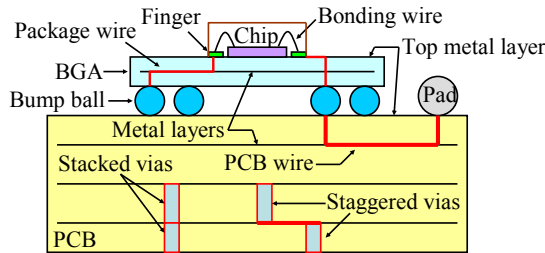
Cross sections of a chip, a BGA package, and a PCB.
